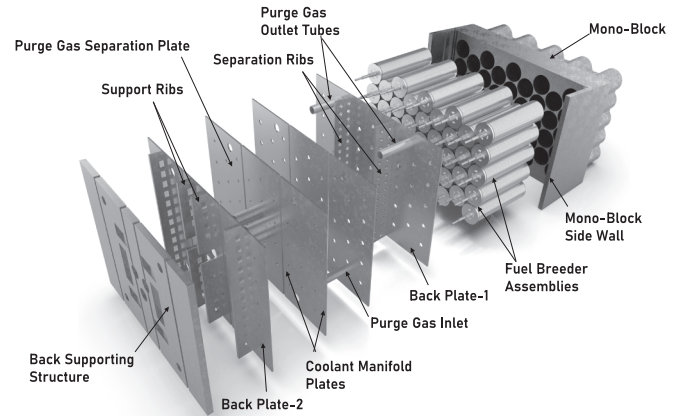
Exploded view of an assembled KIT Monoblock BB section [3].
